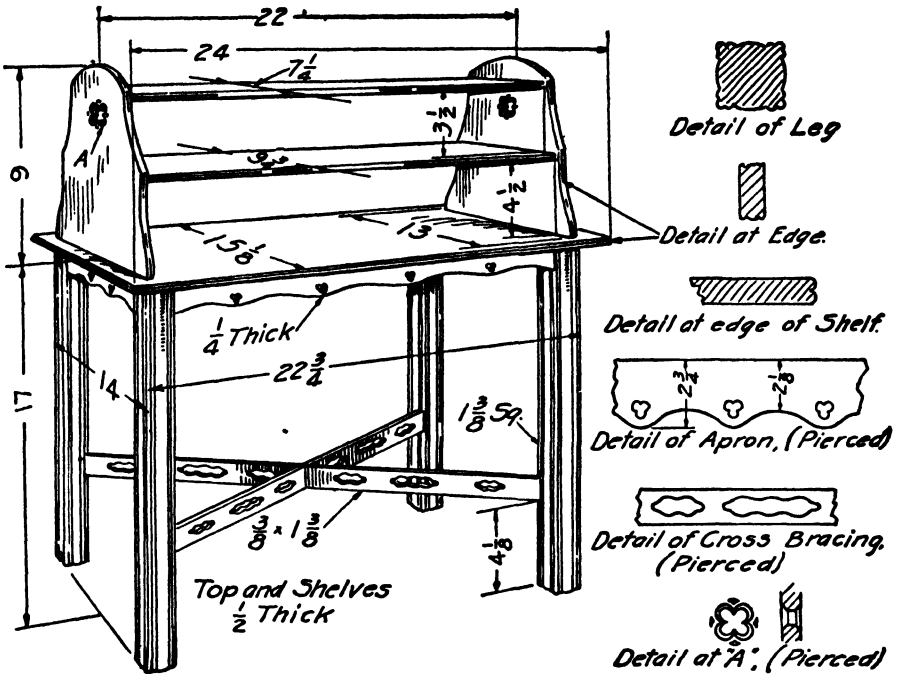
Prob. 294. Make a drawing of the magazine table.
